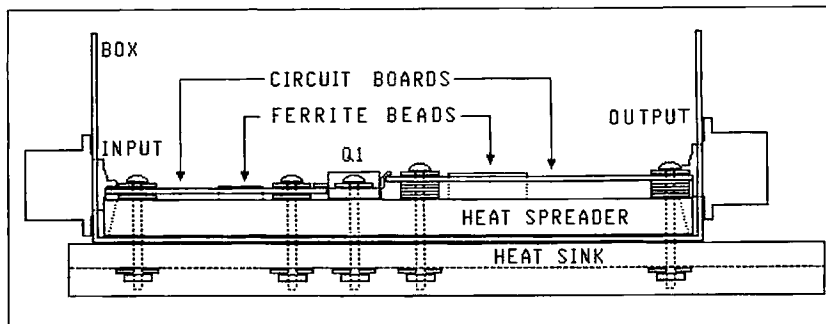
Bolting the amplifier parts together. Note that the flanges of the output of the power transistor have to be bent upward. The output of the transistor can short to the bottom of the circuit board unless a small part of the bottom of the board is etched. See Figure 2.
